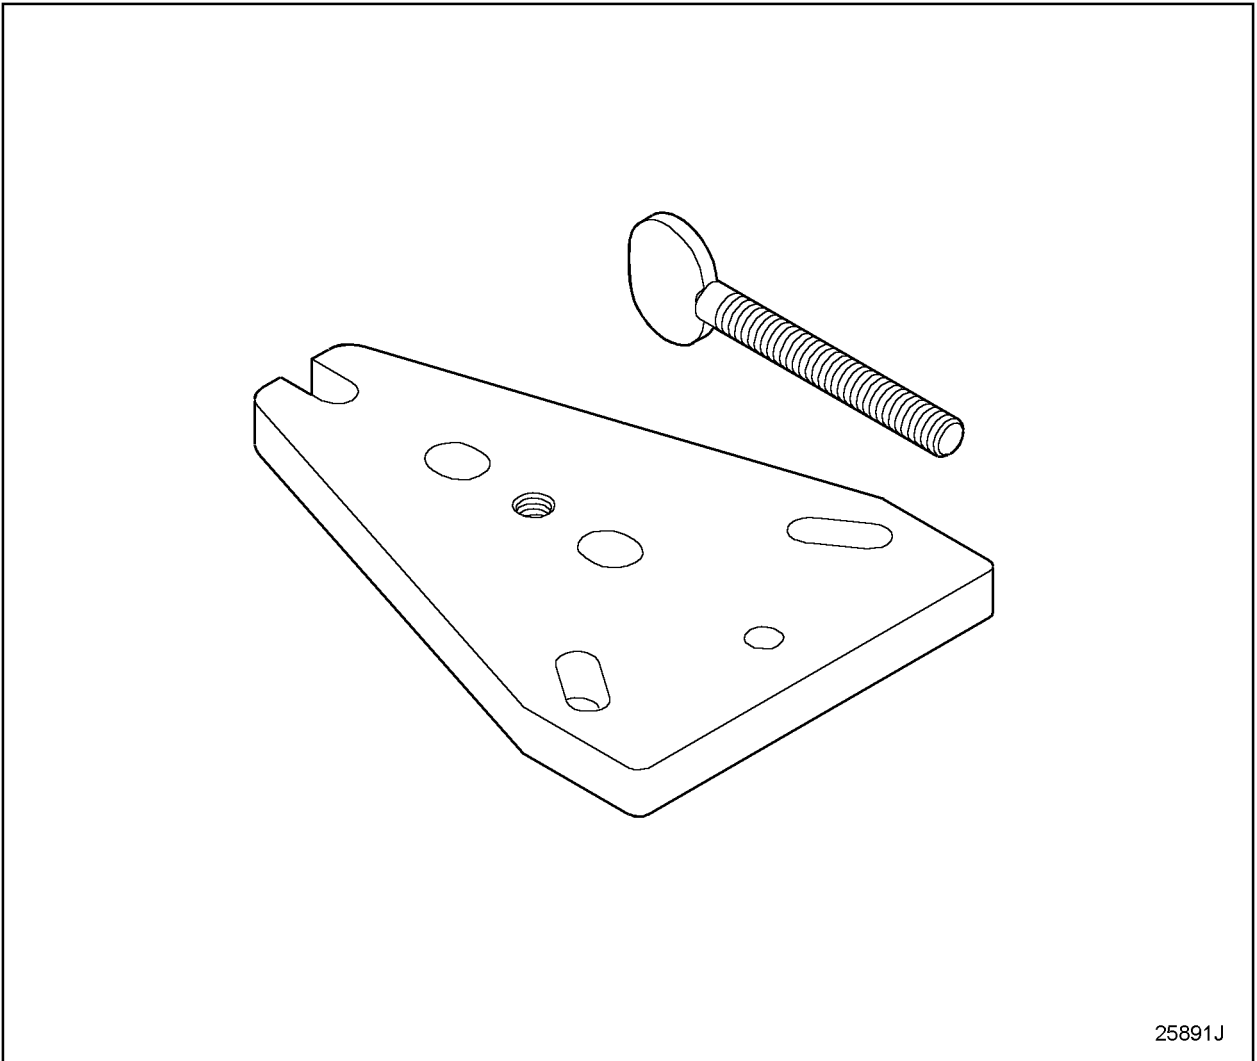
Piston Pin Alignment Tool,J 24285
